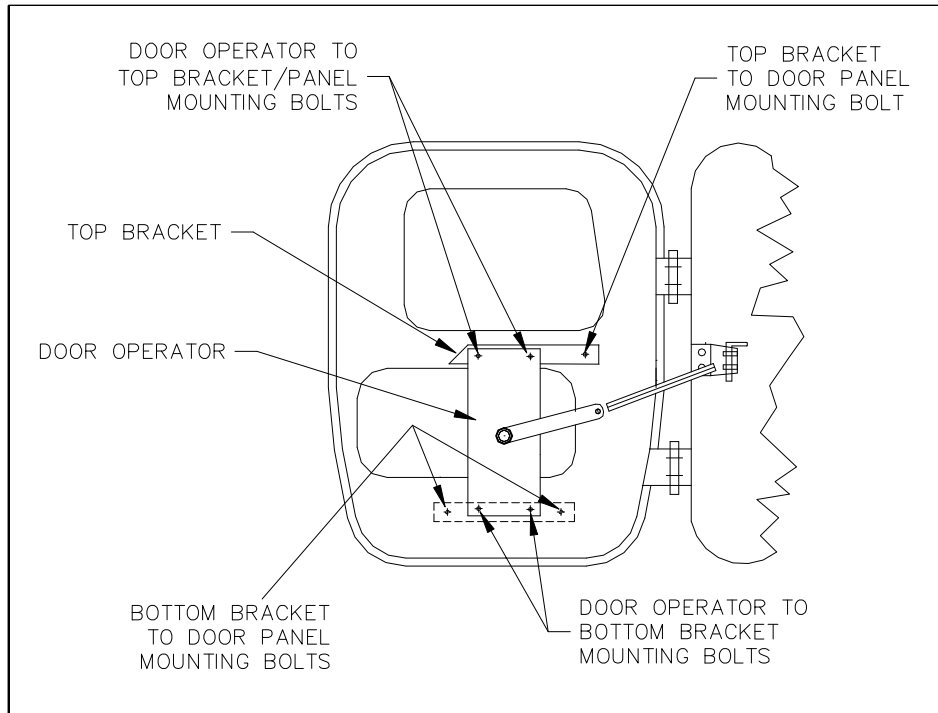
LEFT-REAR DOOR OPERATOR MOUNTING LOCATIONS
